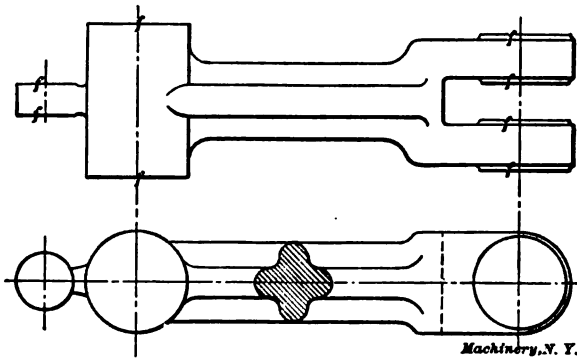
The Work to be Milled in the Fixture in Fig. 59
